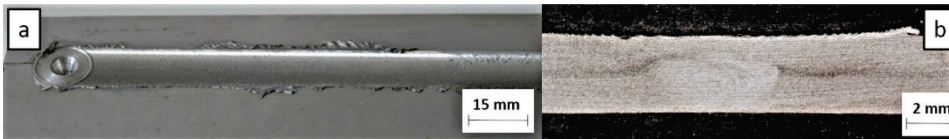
Image of the visually macroscopic defect-free weld of aluminium alloy (a) and cross section of the same weld (b). Image of the FSW tool (75TiC-NiMo) before (a) and after welding of aluminium alloy (b).
